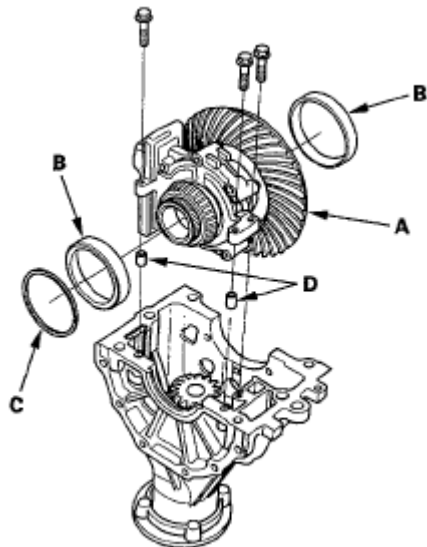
Identifying Ring Gear Assembly, Bearing Outer Races, Shim And Dowel Pins
